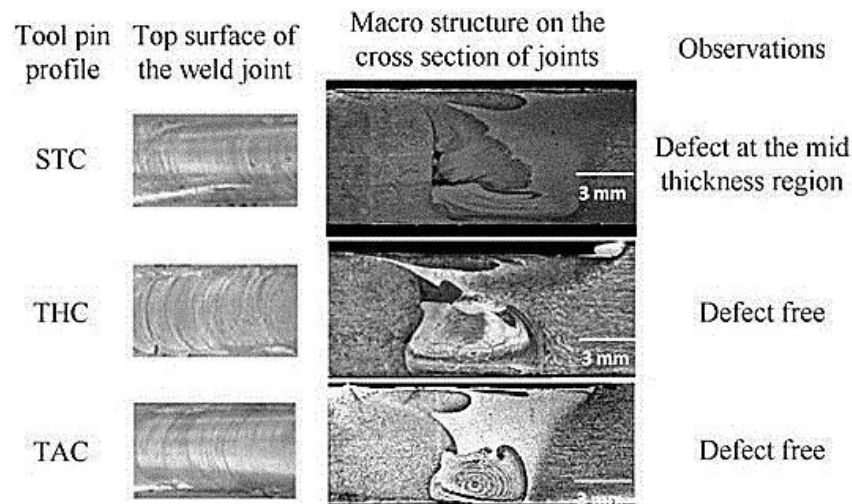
Macrograph view of an FSW weld using three different weld pins [28]. The top picture shows a defect along the weld interface. The subsequent pictures show no defect after the weld.
